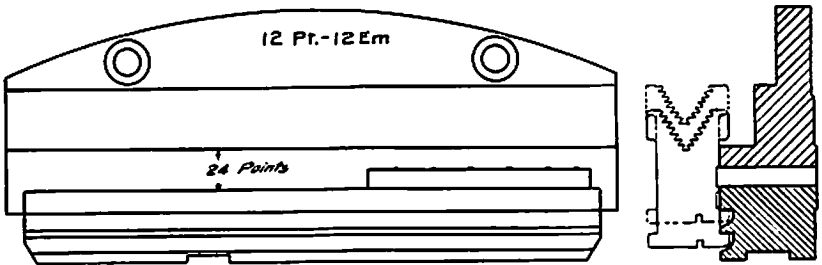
Mold for Solid Slugs. Molds of this type are made to suit the measures desired and require no liners. These molds are designed for casting solid slugs from 5 to 14 points in any length up to 30 ems. Only one point size and length can be cast with a mold cap.
